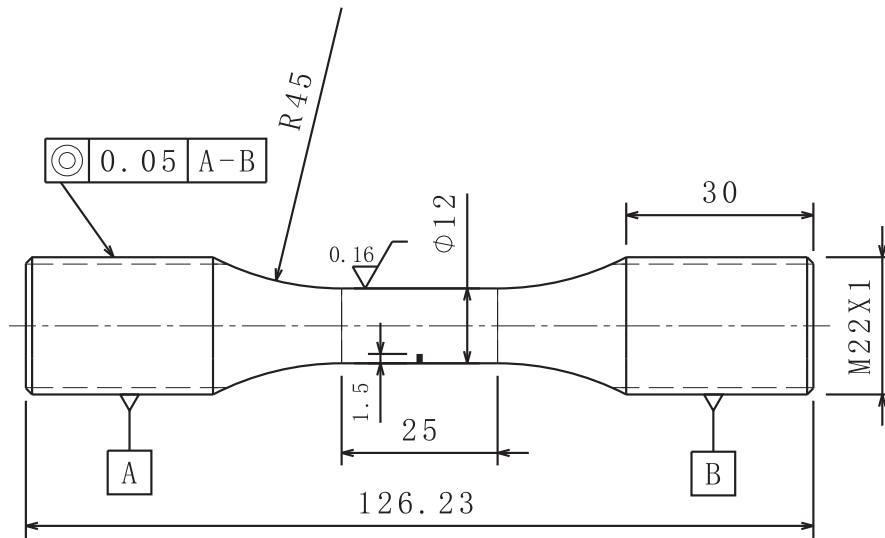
Details of the rod specimen with a straight-front surface crack.
